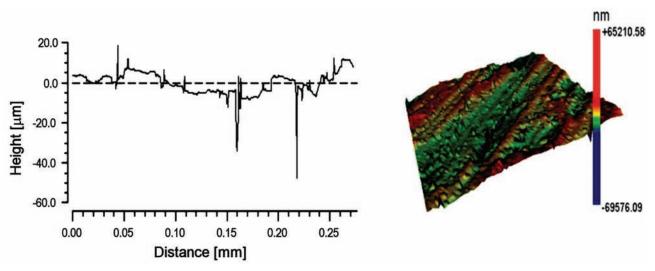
The 2D surface profile and 3D surface profile, after 45 min of machining (diamond coated insert)
